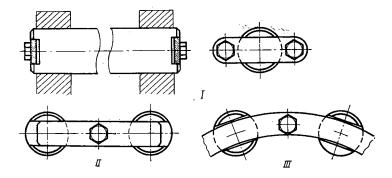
Pivot pin fixed against axial and angular displacements by end plates
